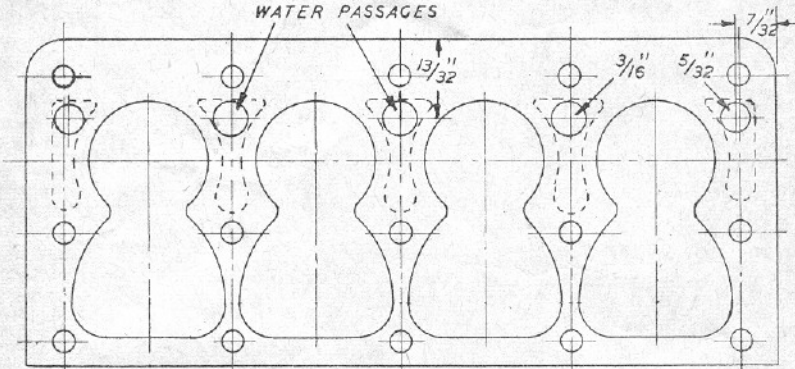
Plan of cylinder-head joint surface, showing position of water communication holes. Dotted lines indicate how holes may be enlarged to suit thermo-syphon circulation
